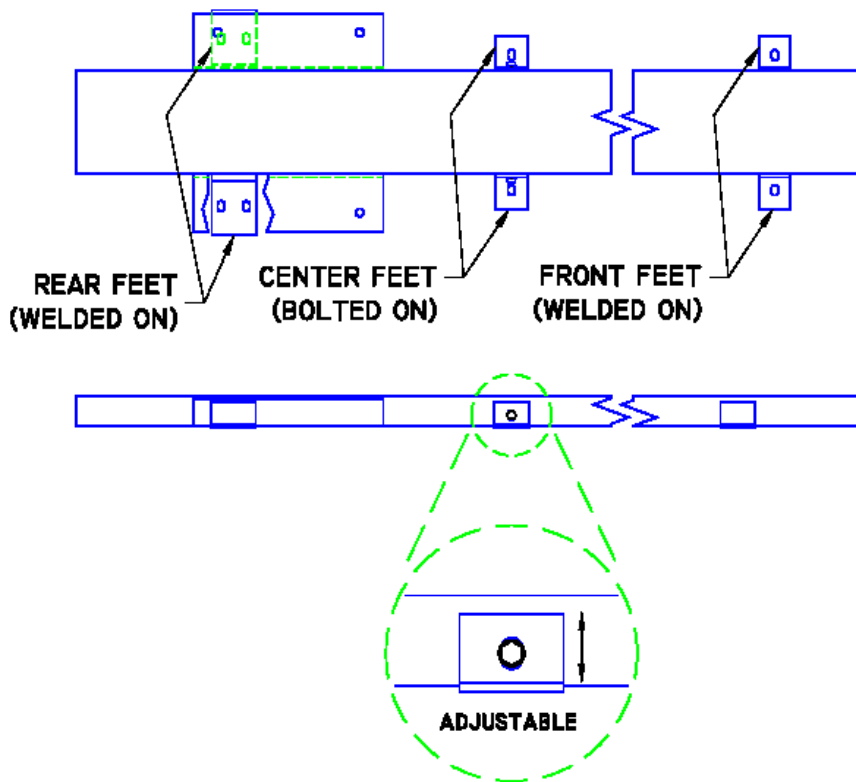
Incorrect placement of the center adjustable feet can cause the bedplate to be drawn down in the middle when the mounting bolts are secured. This will result in alignment problems with the pump, motor, and the suction plumbing of the RO unit.
